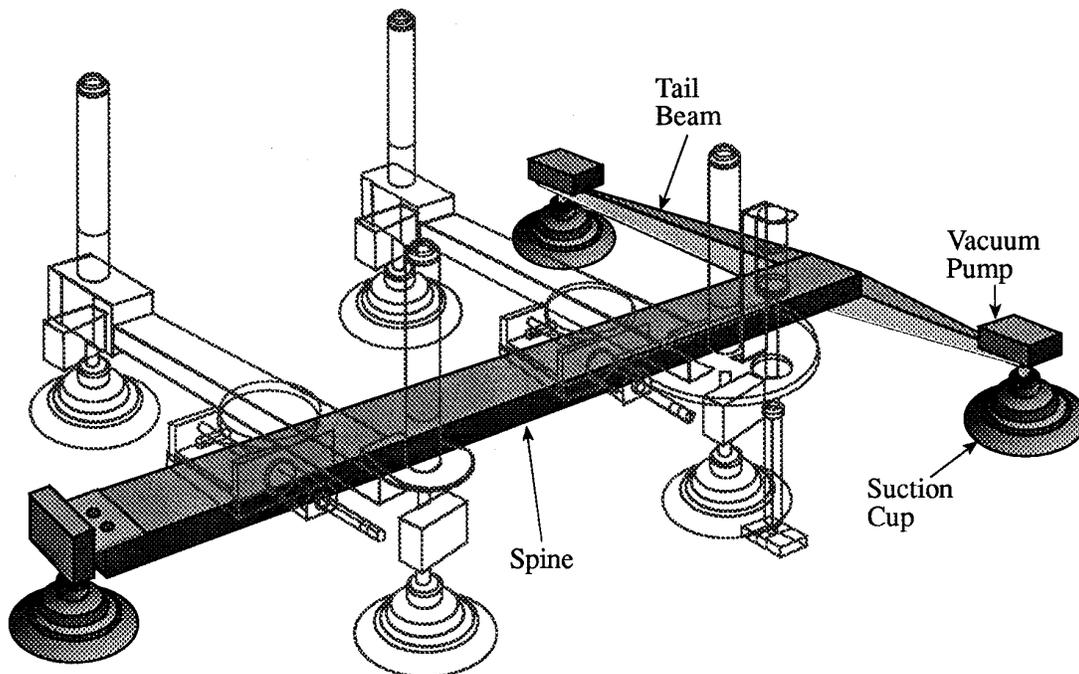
DRAWING OF THE SPINE ASSEMBLY
